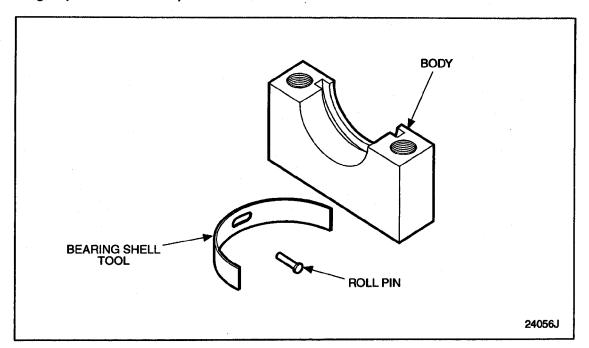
Main Bearing Shell Remover and Installer Tool Set
